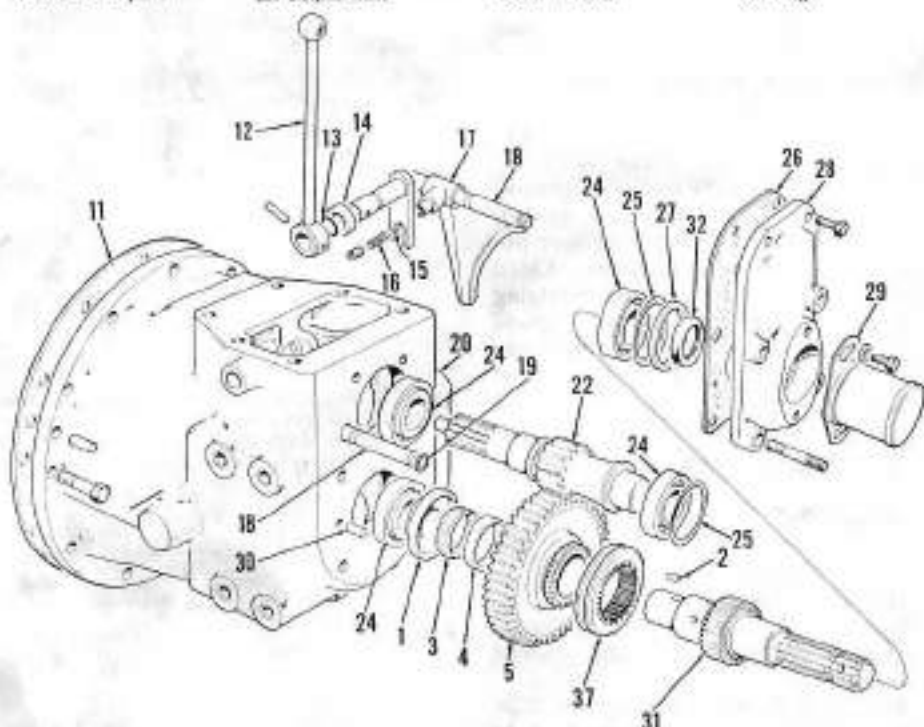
Exploded view of single speed pto assembly for 1410 and 1412 models. Shift fork (17), coupling and related parts permit disengagement of driven gear (5) from shaft (21).
